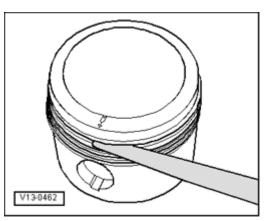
Checking Piston Ring Gap Courtesy of VOLKSWAGEN UNITED STATES, INC.
